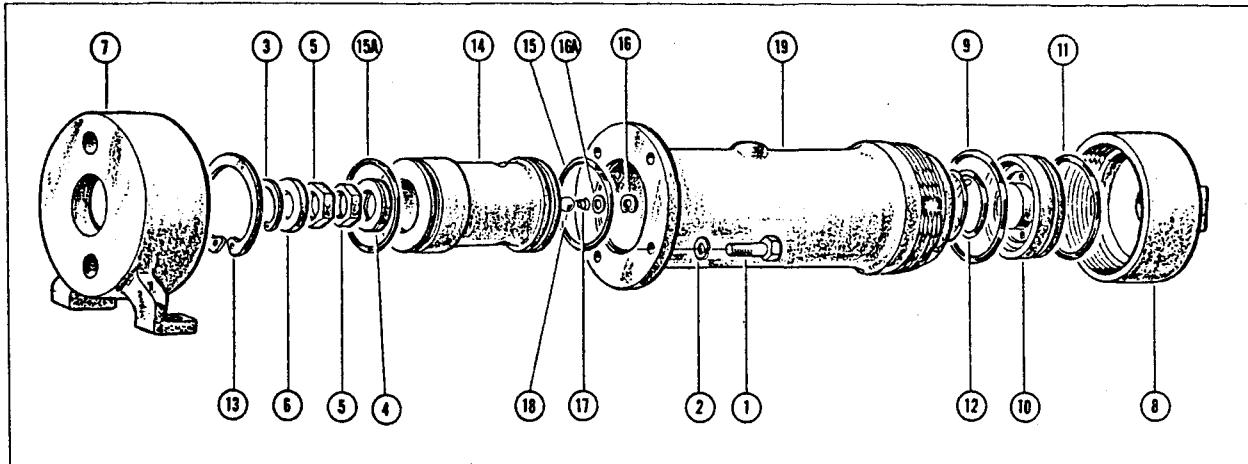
Exploded View, 87-75-1 Master Cylinder Assembly
